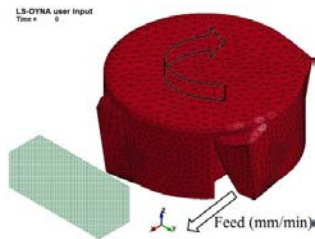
FE milling cutter (double negative geometry) model and SPH workpiece model for nonlinear explicit analysis.
